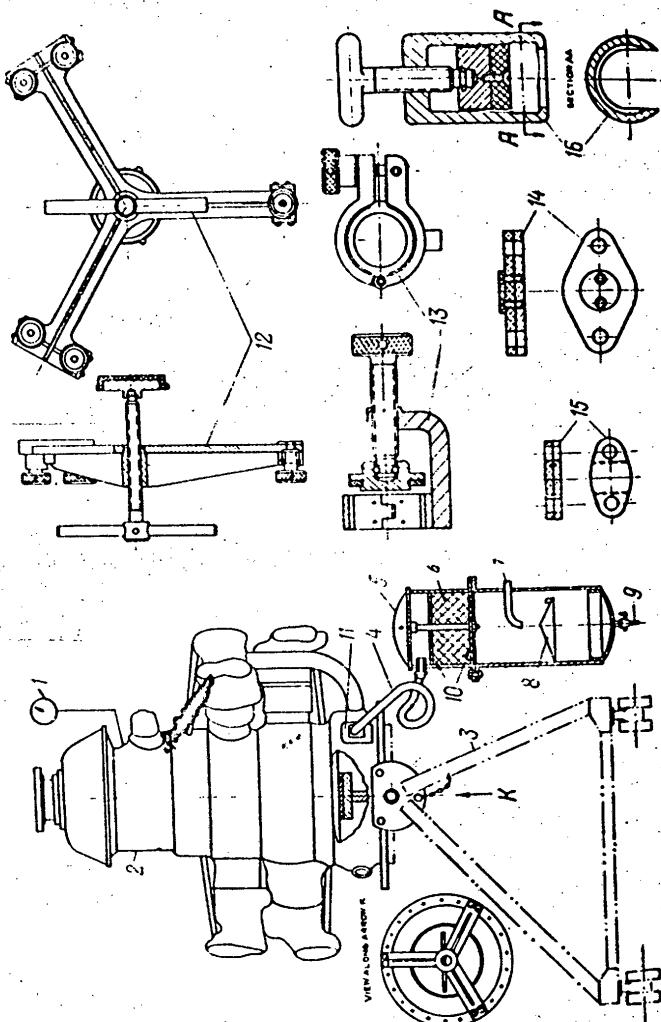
TESTING ENGINE WITH COMPRESSED AIR
